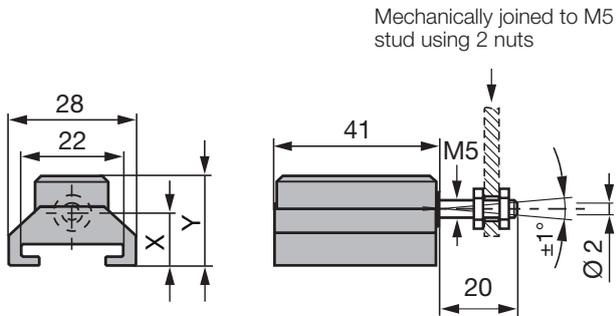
Installation dimensions of BTL5-M/N-2814-1S magnet
